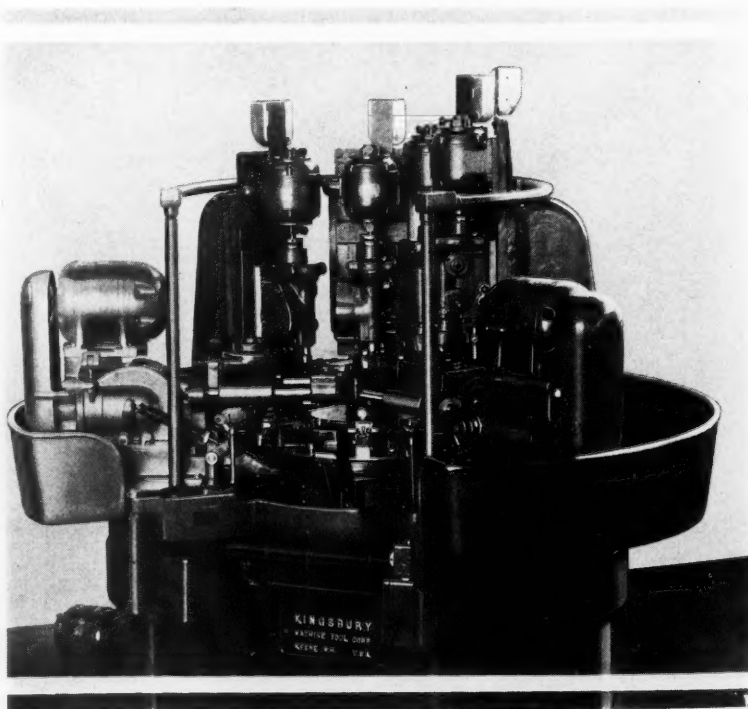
Kingsbury Automatic Drilling Machine Notching and Drilling Shaft Shown in Fig. 12 at the Rate of 850 an Hour
